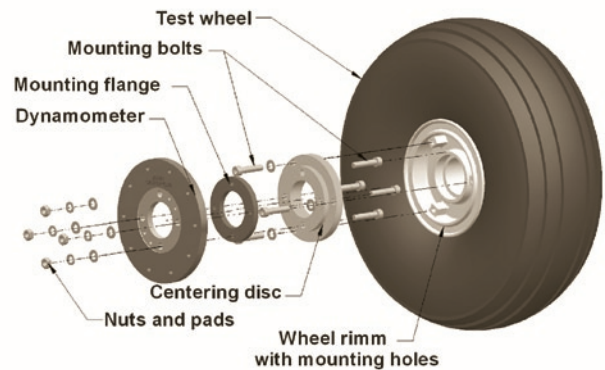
The test wheel with the rotating wheel dynamometer, based on a PZL 104 Wilga undercarriage wheel
